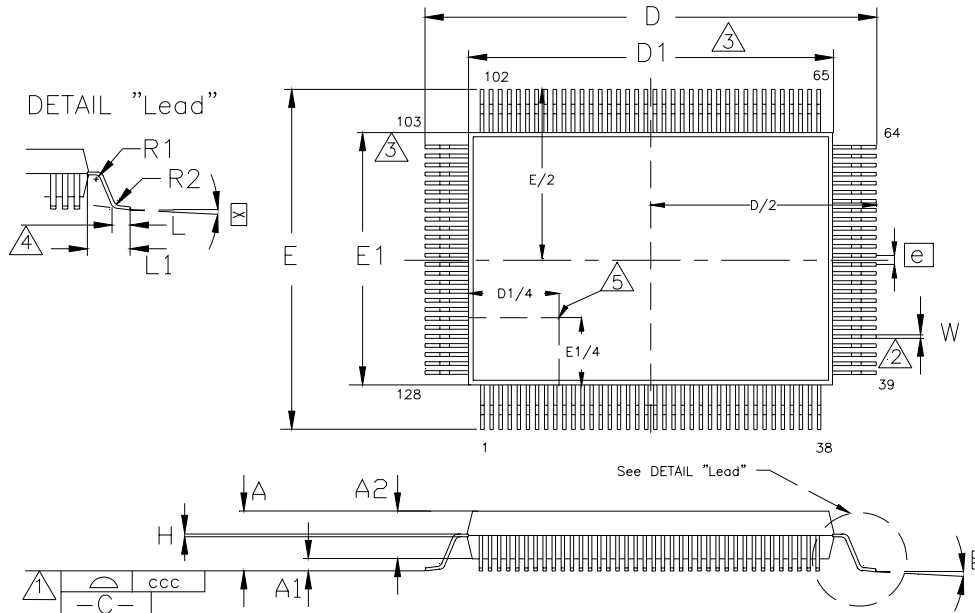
128 Pin QFP Package Outline, 3.9 MM Footprint
